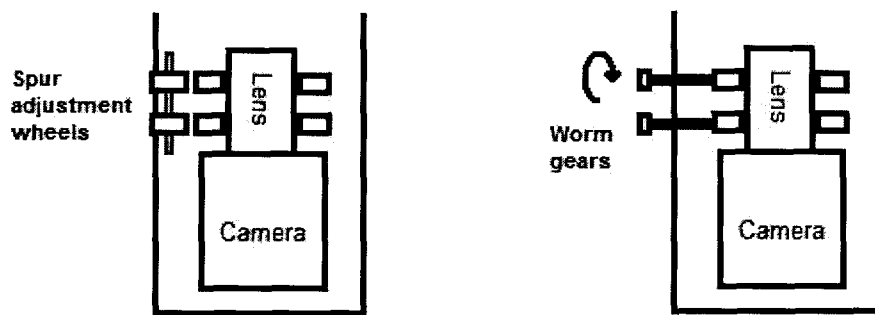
Adjusting the lens: spur gears (left) and worm gears (right)
